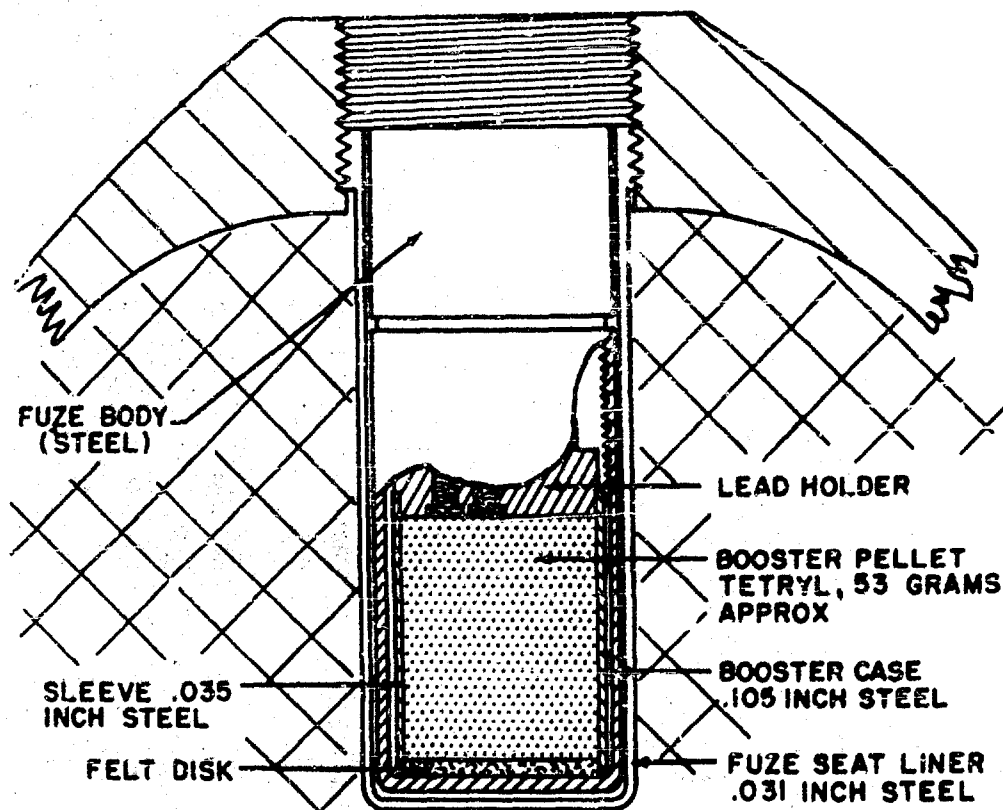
Booster Assembly for Bomb Fuze AN-M103A1.
